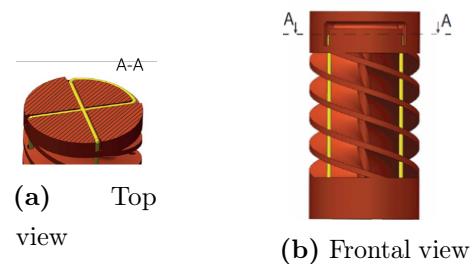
Schematic drawing of 3D printed shaft and assembling cables in yellow. ³
